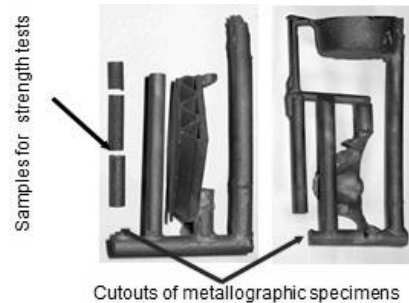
Test castings ready – note the marked places where samples were taken for quality inspection
